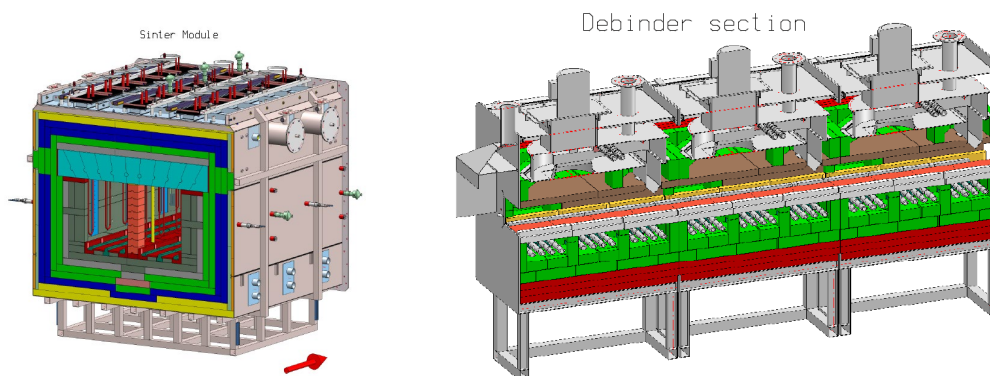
Typical cross section of tunnel kiln technology utilising renewable power
